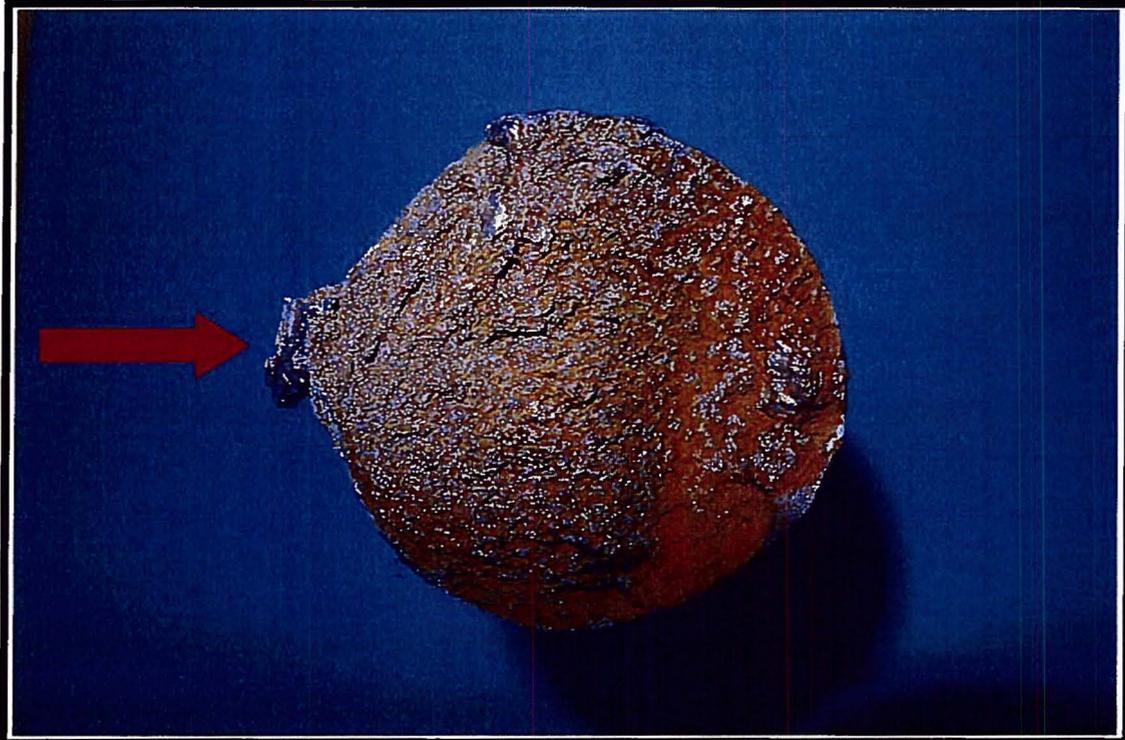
End view of fracture showing weld metal (arrow).
